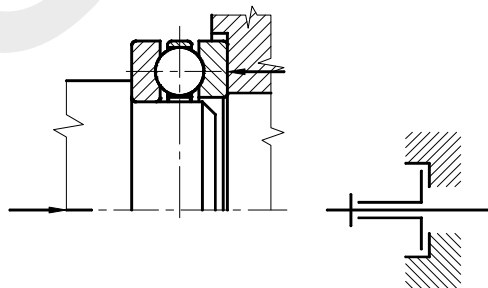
Bearing retaining of a single row thrust ball bearing
